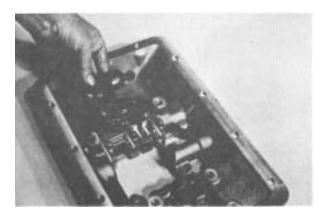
Position 1st & reverse rocker arm on pivot pin as shown.
